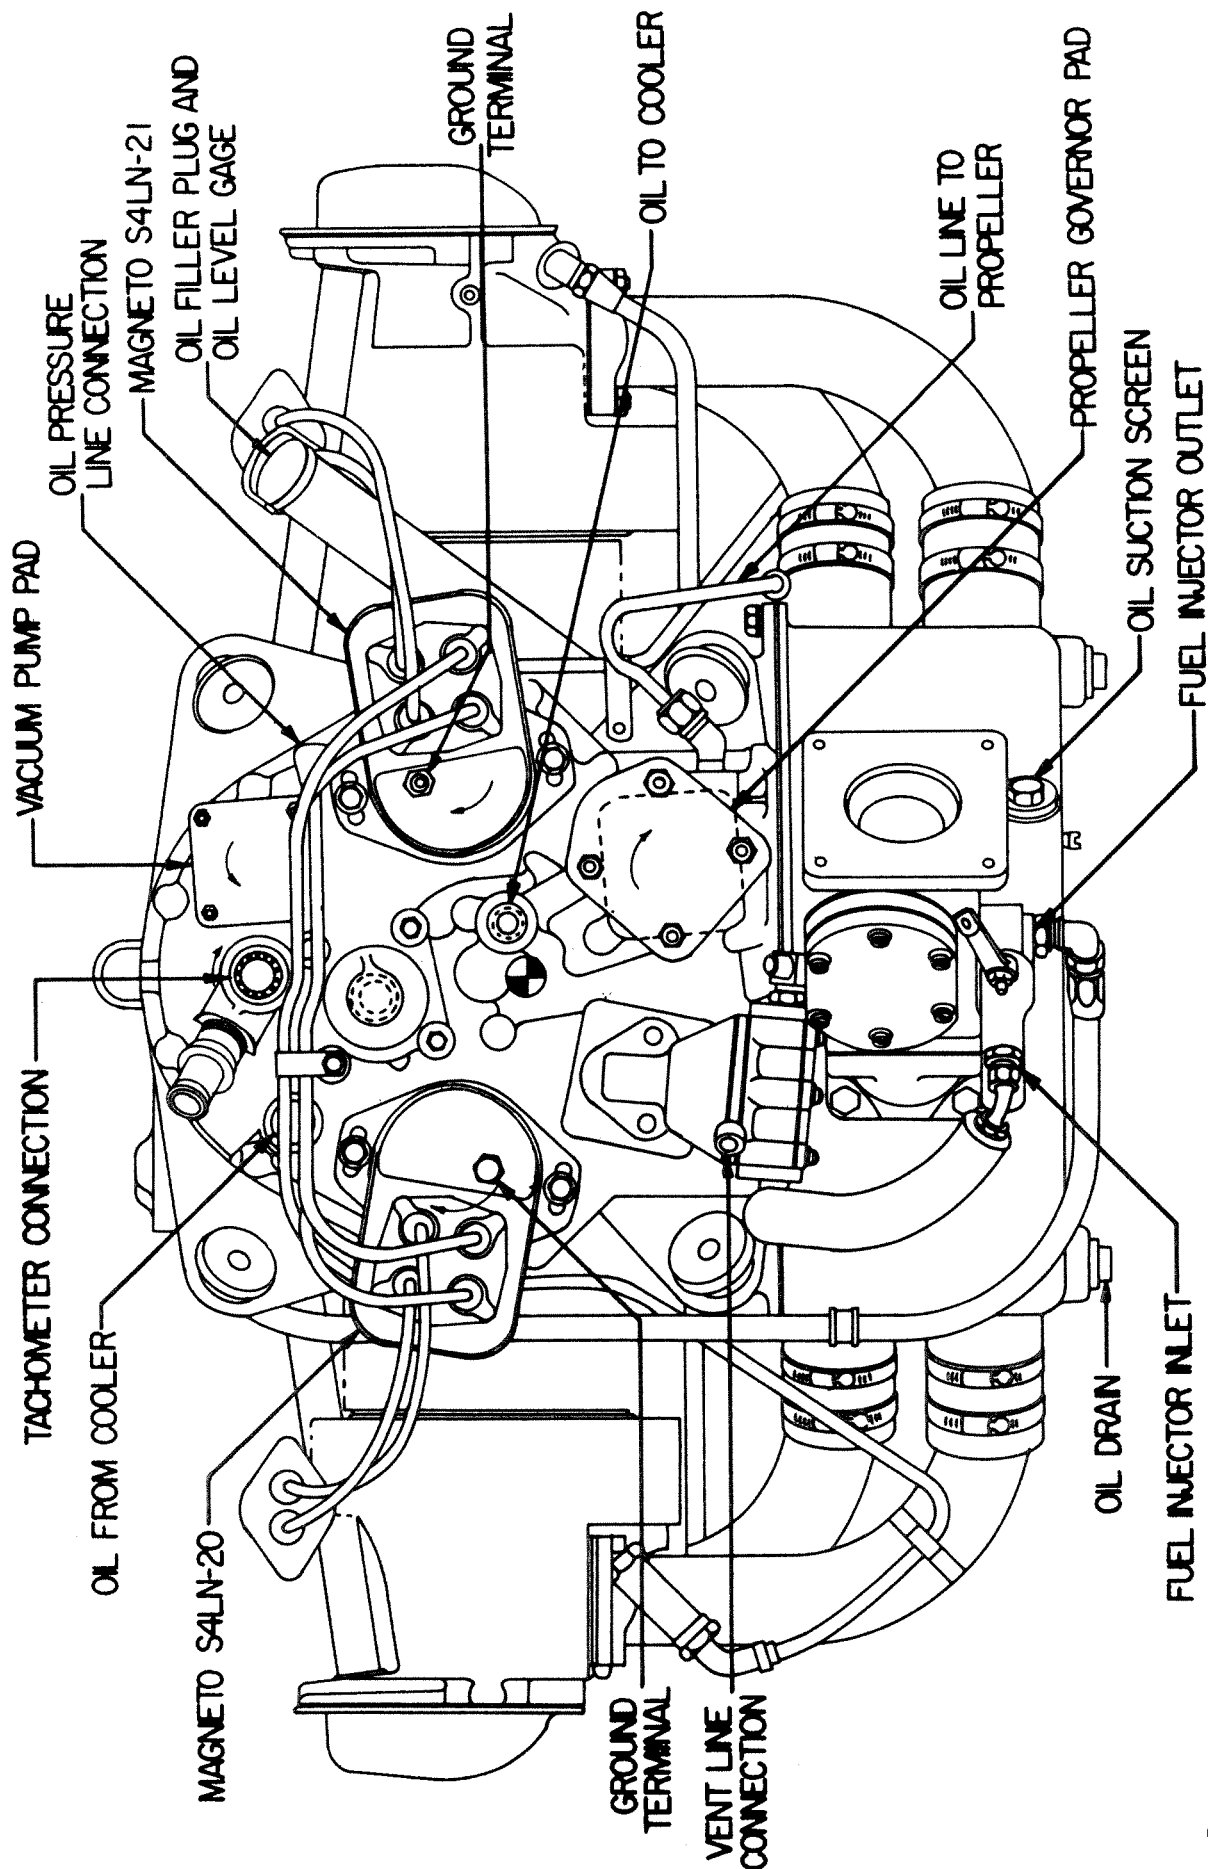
Installation Drawing Rear View - Typical IO-320-B Series
